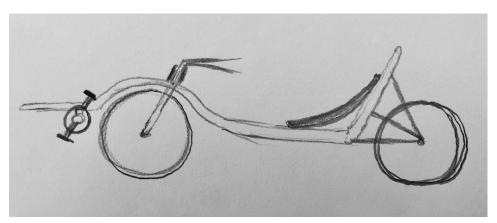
Steel tubing design with roll hoop and bottom bracing.
